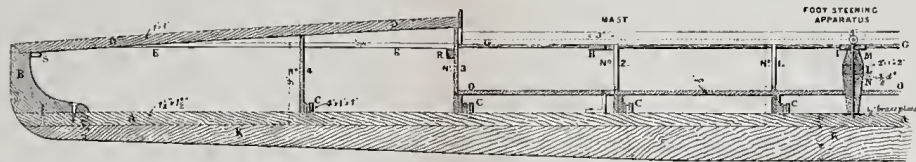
LONGITUDINAL SECTION OF CANOE FROM STEM TO FOOT STEERING APPARATUS.
